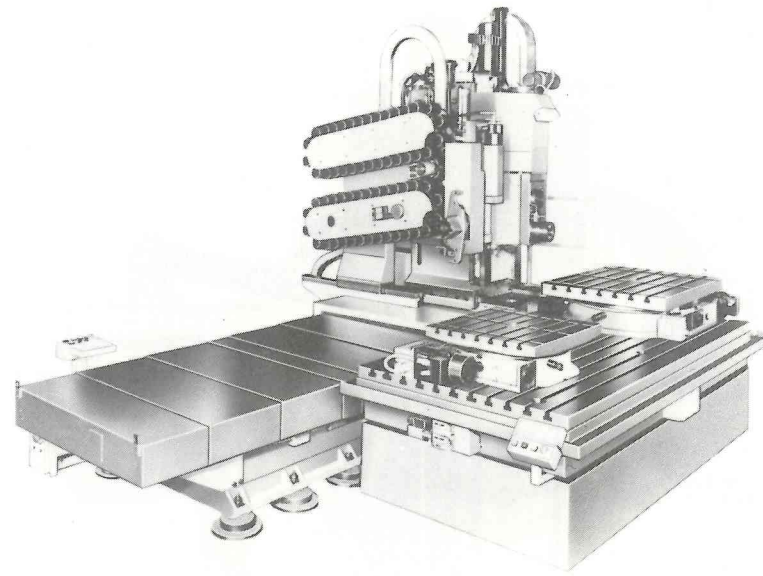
Horizontal machining center with chain-type tooling magazines.
